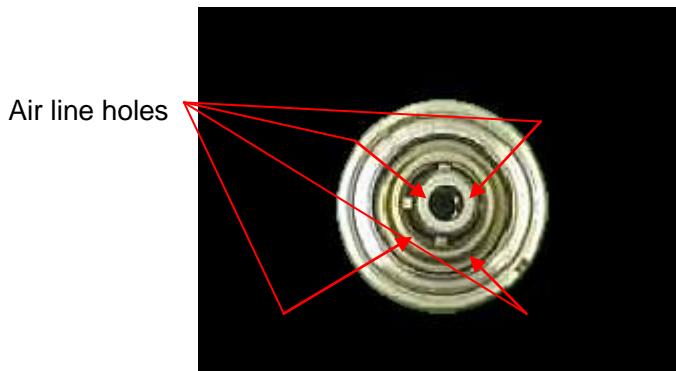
Locations of air line hole (front view of the plug)
